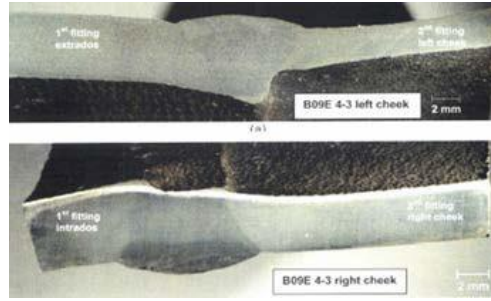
FAC damage under welds in ex-service feeders.
